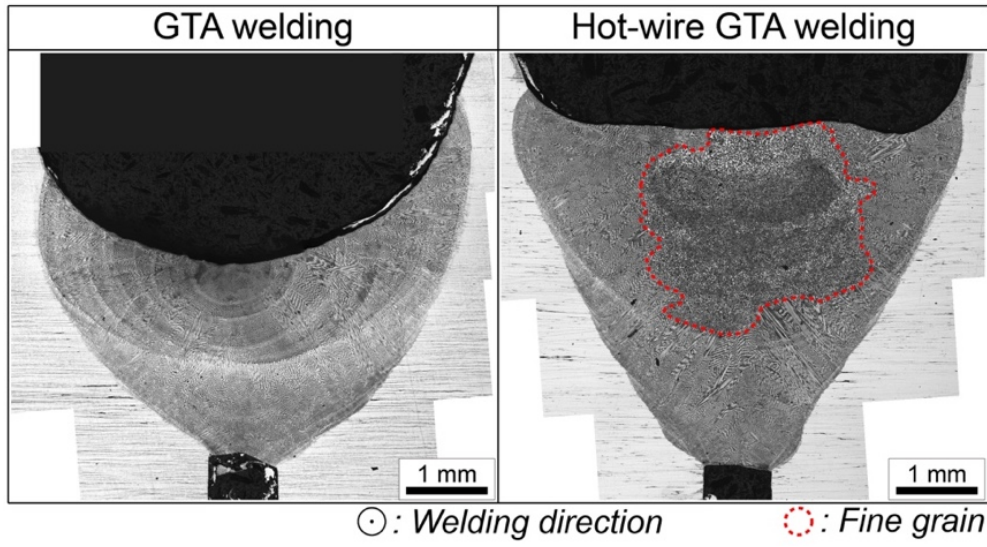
Cross-section of weld bead at each welding process.
